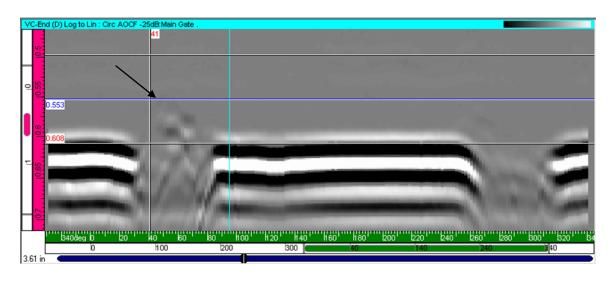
TOF Shapes Showing the Weld Intrusion into the Penetration Tube of Nozzle 60
